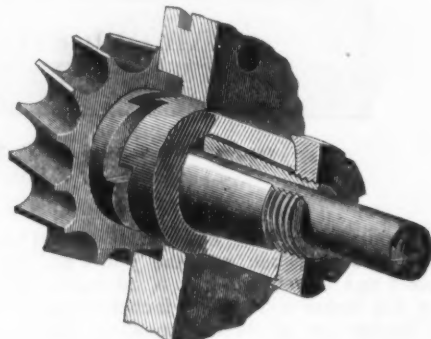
Pinion, Clutches, Box, Nut and Section of Reel Shaft.
